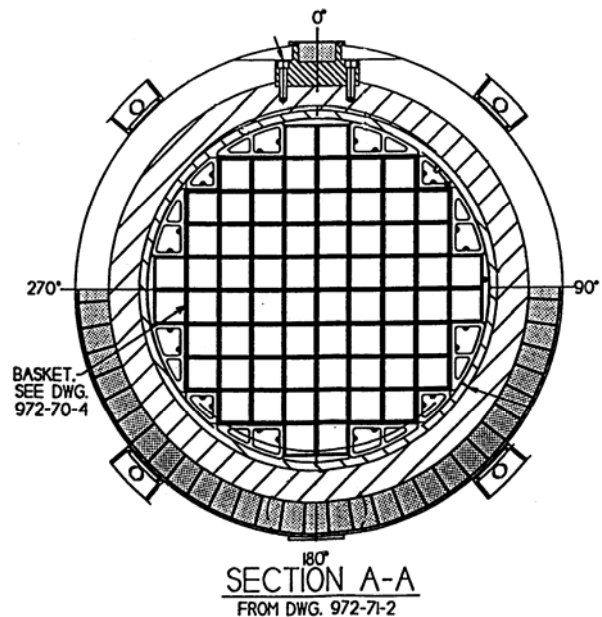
Cross-section of TN-68 Package (drawing 972-71-3 Rev. 4, “TN-68 Packaging General Arrangement: Parts List and Details”)
